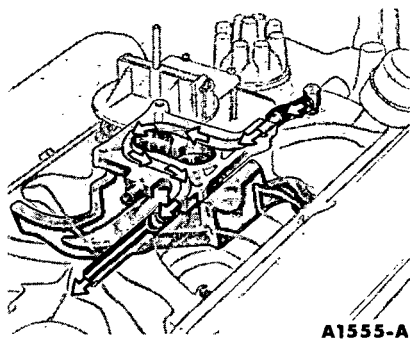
Typical Engine Coolant—Heated Spacer Passages—390 2V
